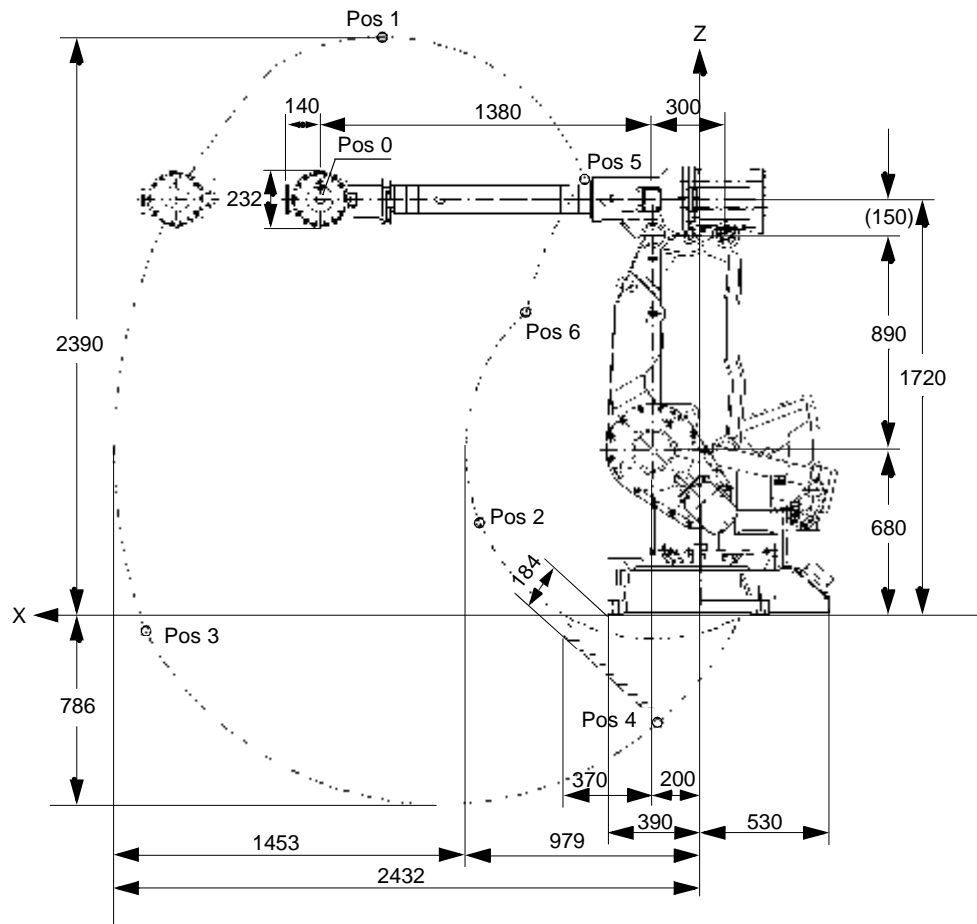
The extreme positions of the robot arm IRB 4400/L30 (dimensions in mm).
